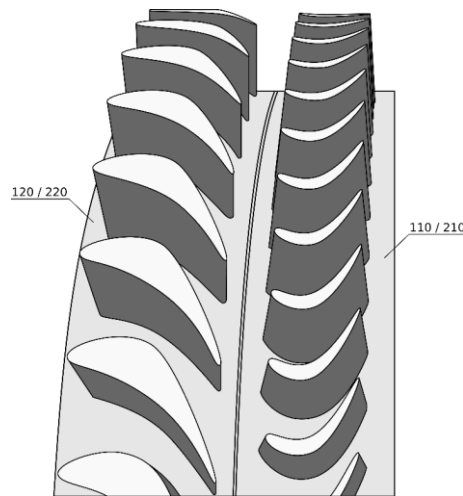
PERSPECTIVE OF THE NEW TWIN-ROTOR TURBINE WITH SPIRAL CASING NOZZLE/DIFFUSER AND PLENUM CHAMBER.
